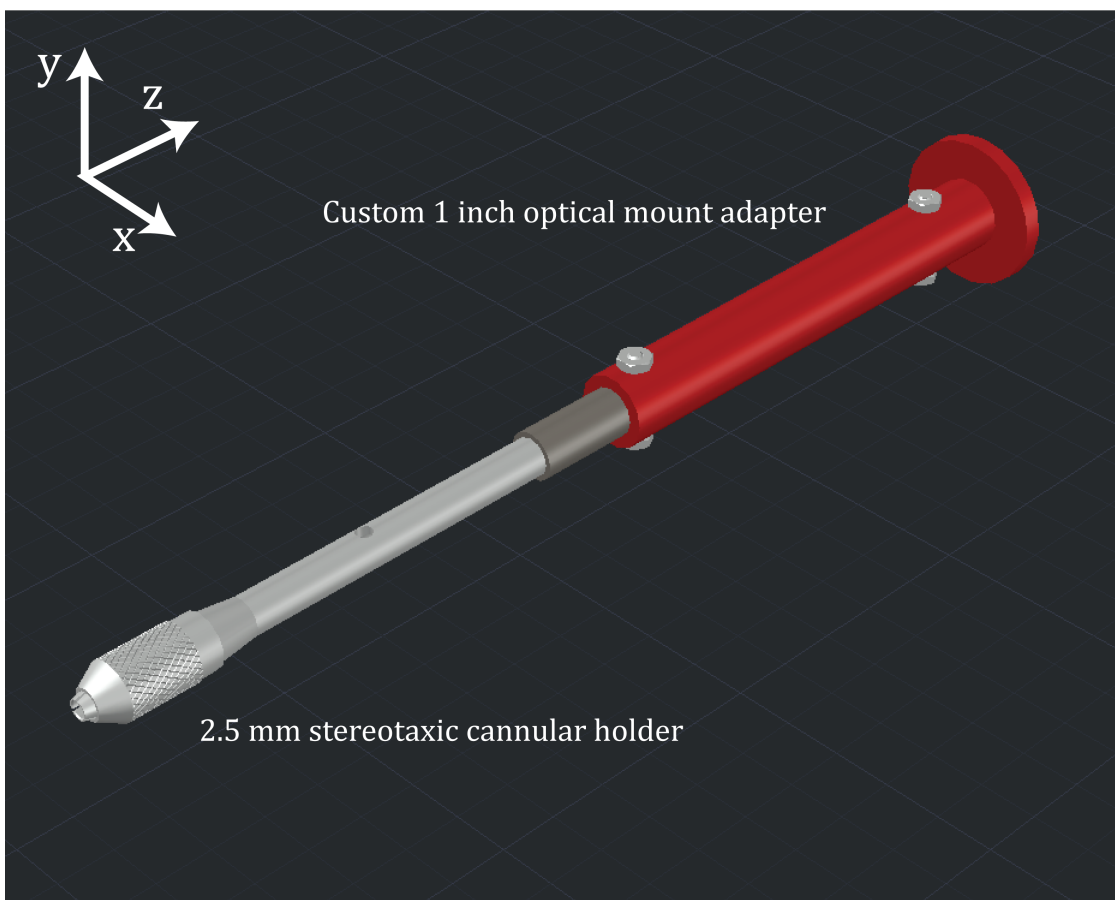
AUTOCAD rendering of the sample holder adapter to optical mounts made for one inch optics.
